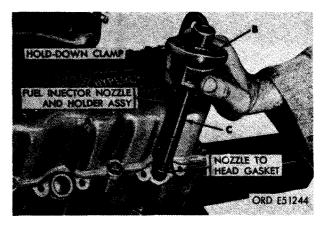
INSTALLING FUEL INJECTOR NOZZLE AND HOLDER ASSEMBLY.
